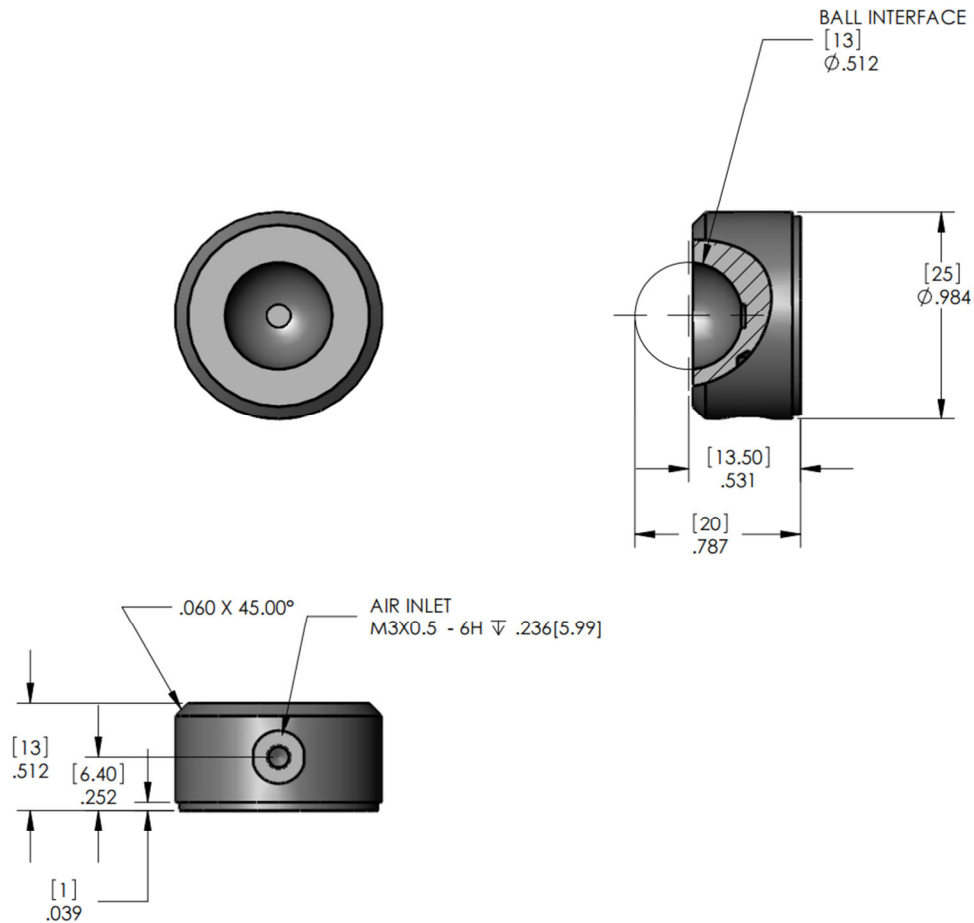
Engineering drawings of the FP-C-010 round flat pad air bearings manufactured by Nelson Air Corp. The unit is inch (mm in the bracket) [77].
